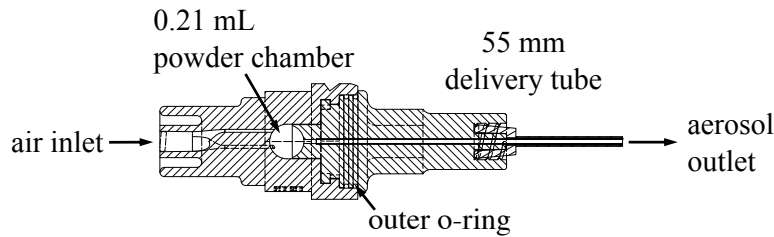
Axial cross-section view of the assembled modified containment unit DPI with 55 mm delivery tube length. Inlet body (▨) and outlet body (▩) portions differentiated by fill pattern.
